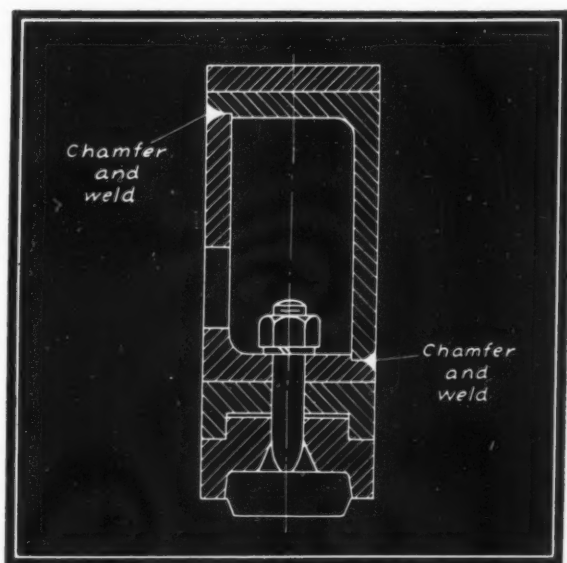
Welded construction is employed to produce a strong box-type beam for the dipper handle
